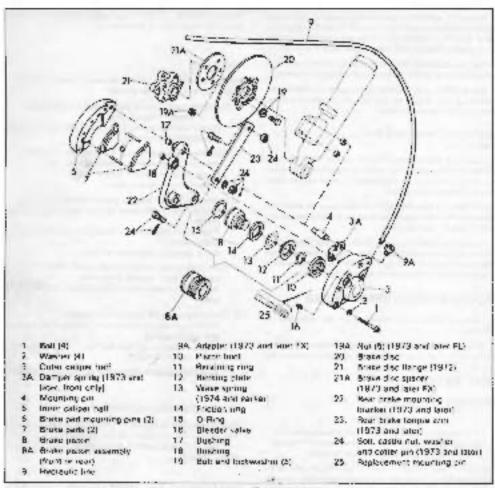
Chic Brake - Explored View 1972 and Later FL/FLM Front and Rear. 1973 FX Franciand Nove, 1974 LX/EXE/LKS Rear Only
